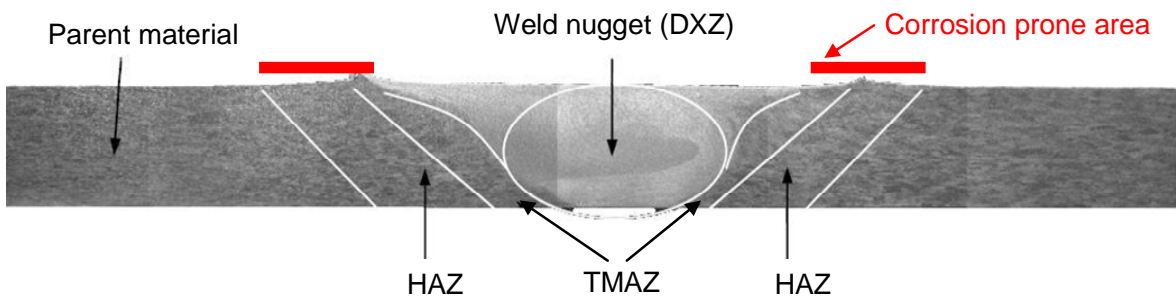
Friction Stir Welded Stringer and Skin.
